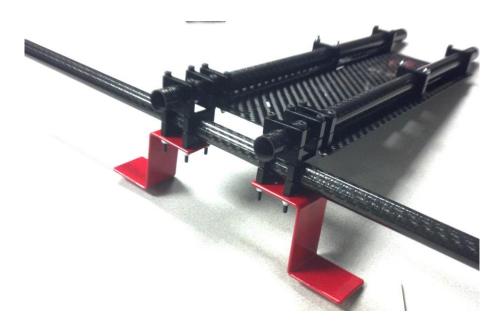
Connect it to the fuselage subassembly and loosely tighten nuts
